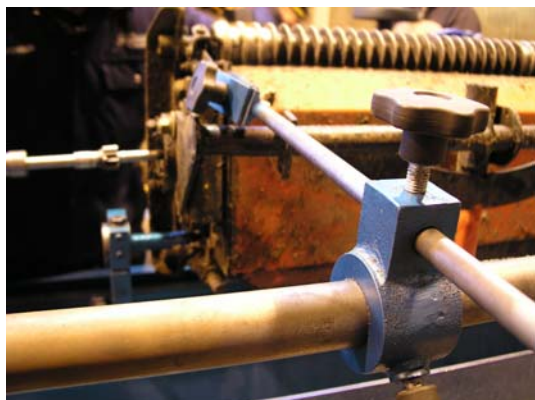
Grab arm securing frame viewed from the rear of the machine
